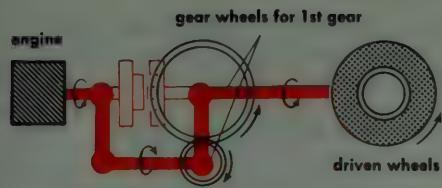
GEARBOX WITH 1ST GEAR ENGAGED
